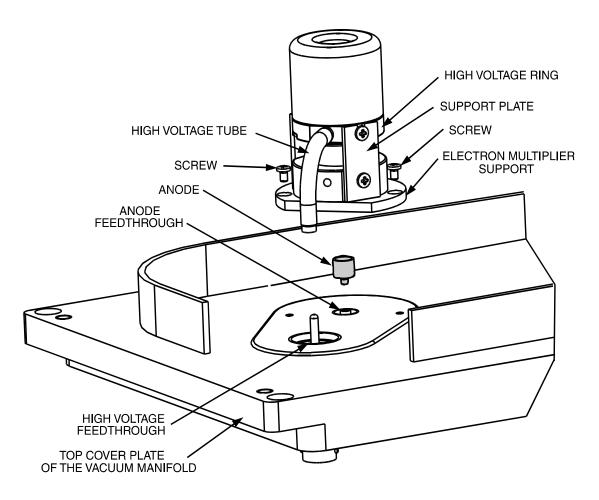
Exploded view of the electron multiplier, showing the anode
